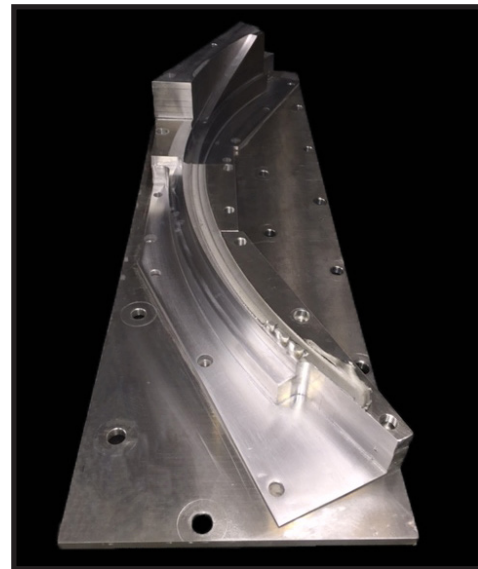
Partially-machined friction stir welding demonstrator article, view 2
